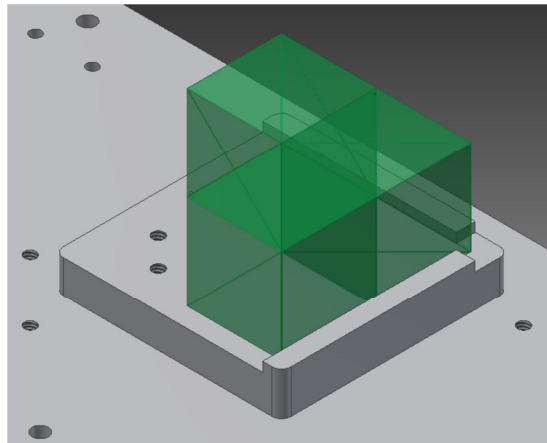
A CAD screenshot of the beam splitter platform and assembly.
